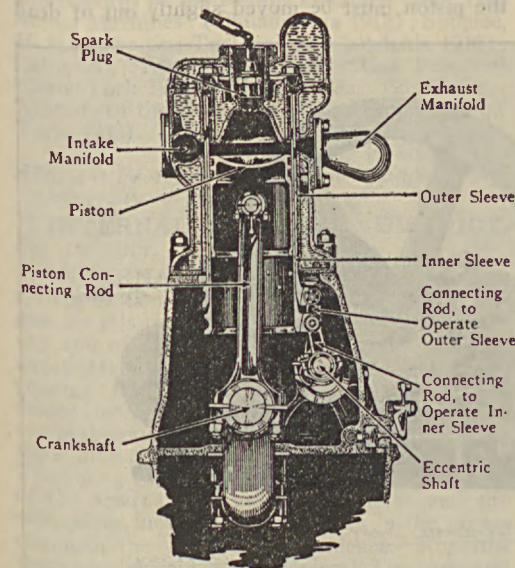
Sectional View of Cylinder in Willys-Knight Motor.
